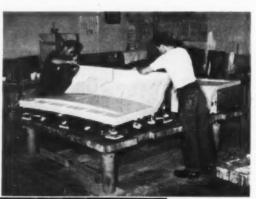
Laying-up glass cloth and resin on checking fixture mold
